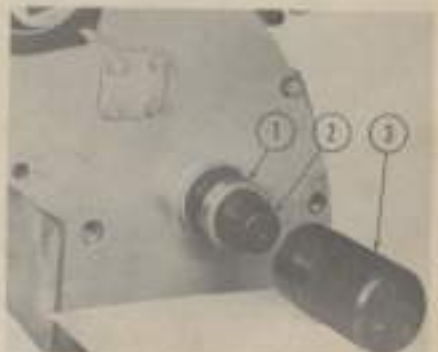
After timing gear cover on D-14 and D-15 non-diesel engines is installed (See Fig. 40), place seal protector (2) over end of crankshaft and drive seal (1) into cover with lip to inside using alignment tool (3) as a seal driver.
